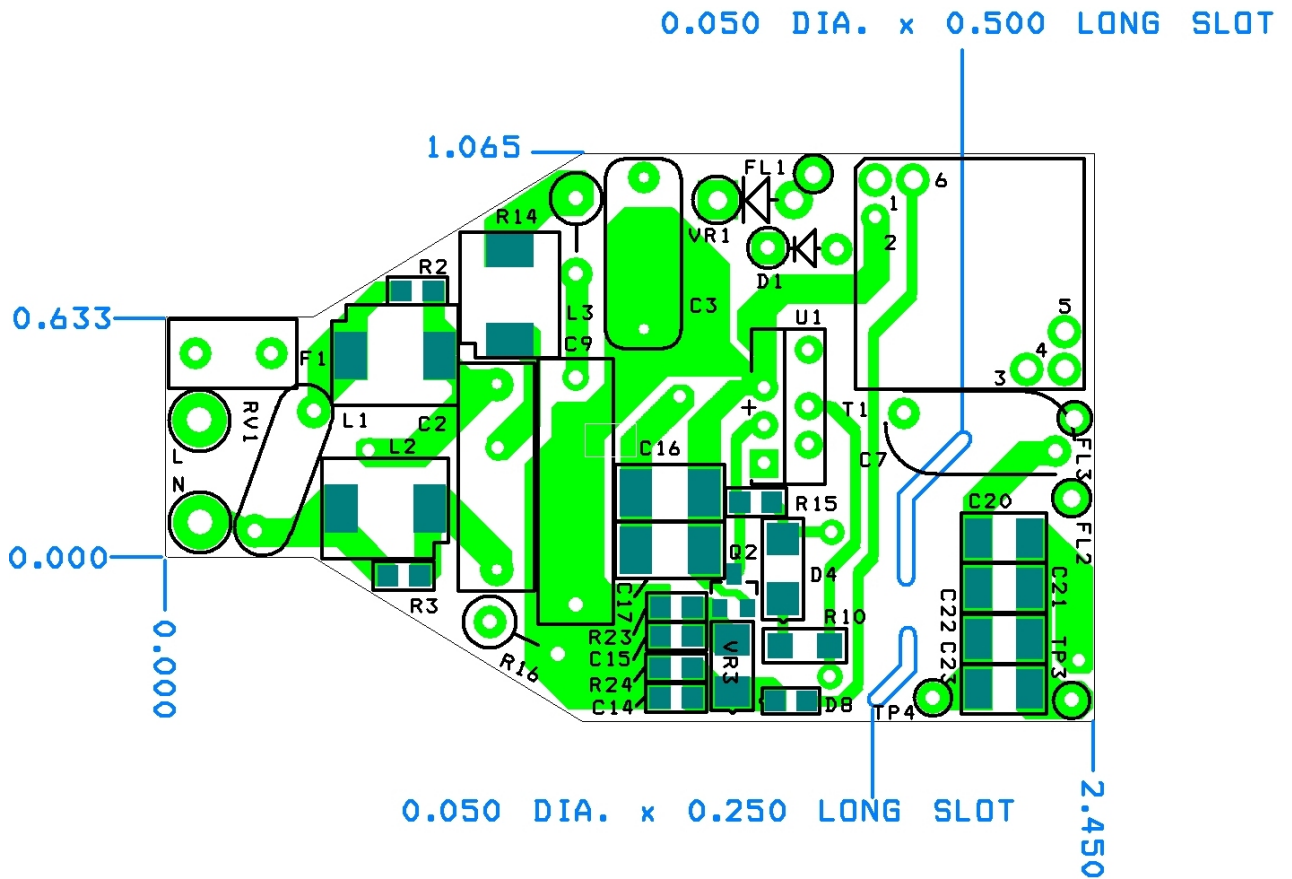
Printed Circuit Layout Top. (Designed to Fit Inside PAR20 Lamp Form Factor).
